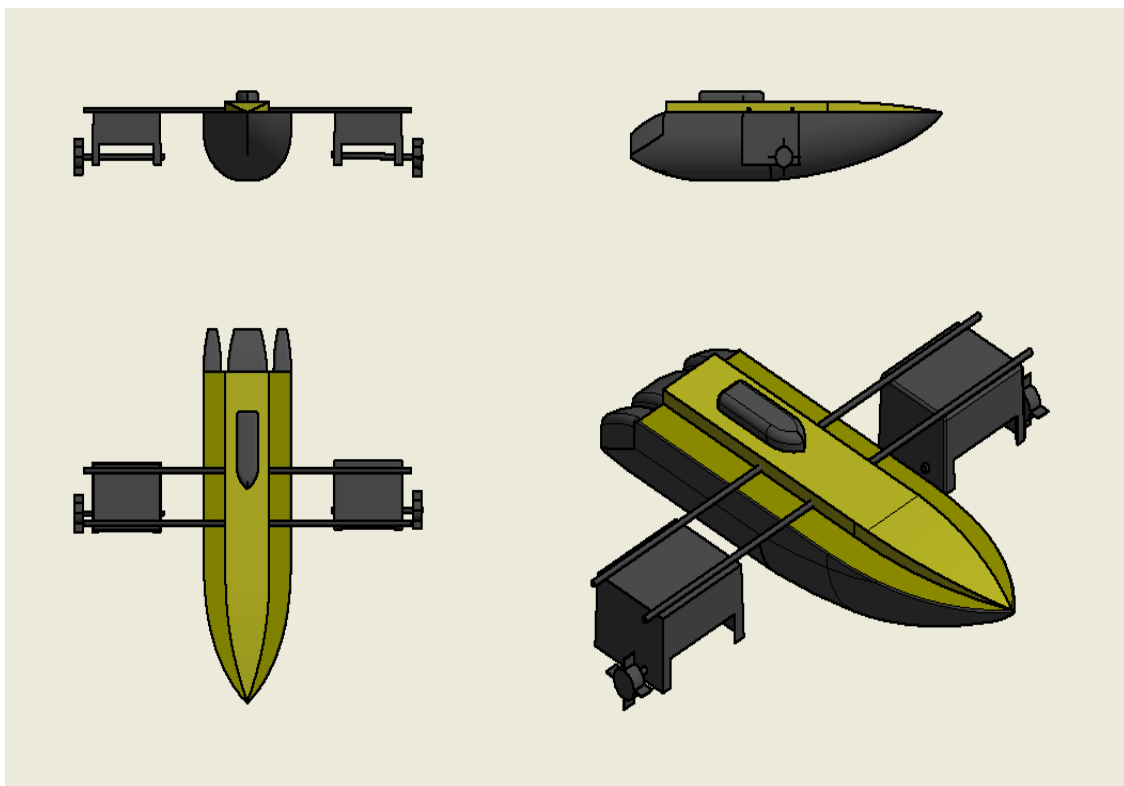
3D Sketching of Front, Side and Top Robot
